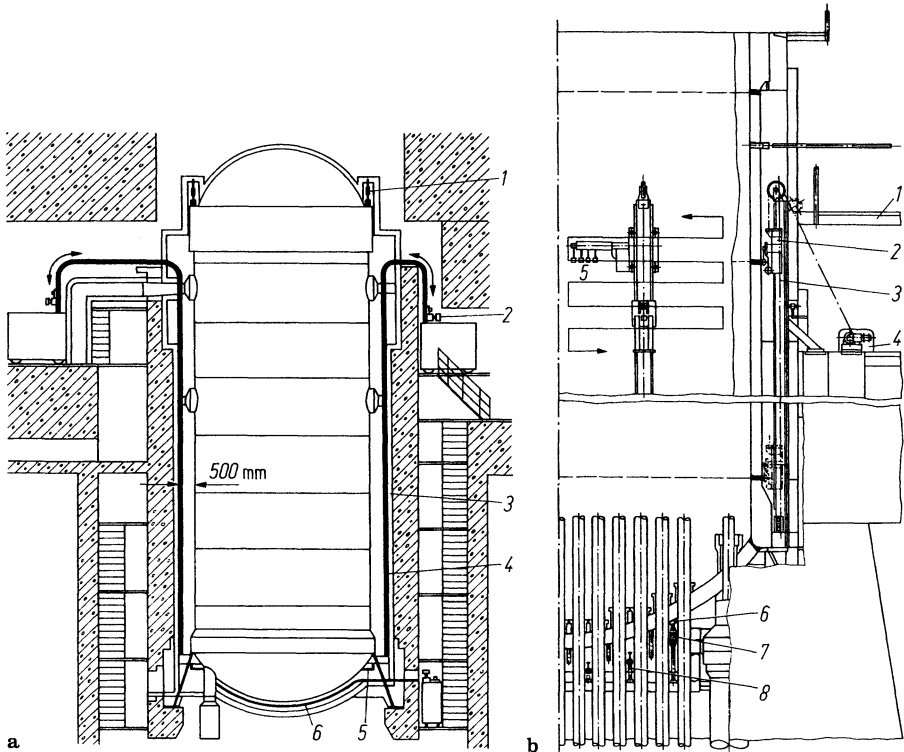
Manipulators for the external testing of a boiling-water reactor vessel. a Design KWU, 1 manipulator for the screw bolts, 2 universal manipulator, 3 concrete shield, 4 longitudinal rails for circular- and longitudinal welds (flange seam, nozzle seams), 5 guiding rails for the base circular-seam manipulator, 6 bottom rail; b design MAN, 1 service platform, 2 testing trolley, 3 longitudinal rail, 4 lifting motor, 5 probe system, 6 probe for the spherical base, 7 testing trolley, 8 bottom rail
